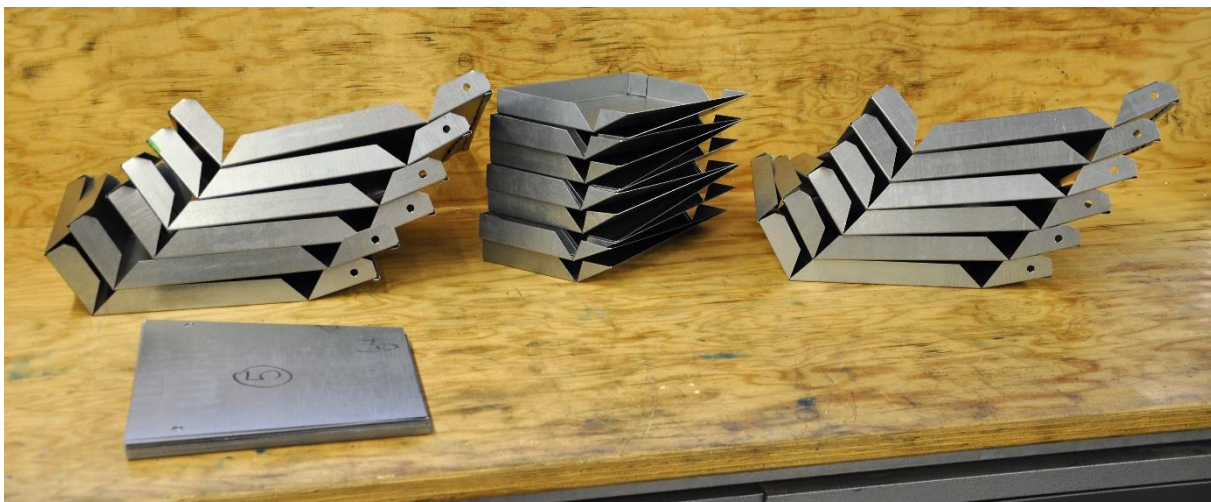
Single water wheel elements of the prototype ready for assembly
